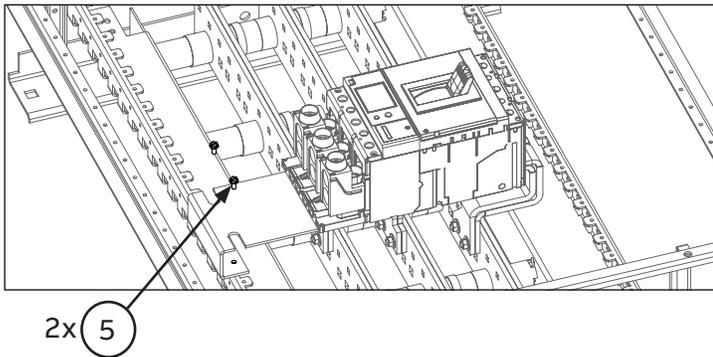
Alignment of breaker and mounting bracket assembly on the frame
